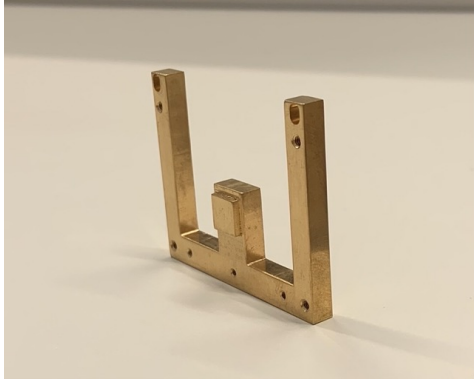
Sample holder, material is copper with gold plating over top.
